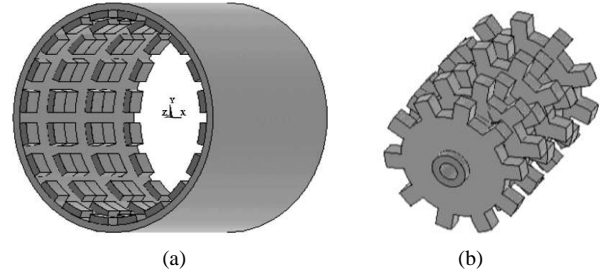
Magnetically relevant parts of TFM with SMC core (a) rotor, (b) stator
